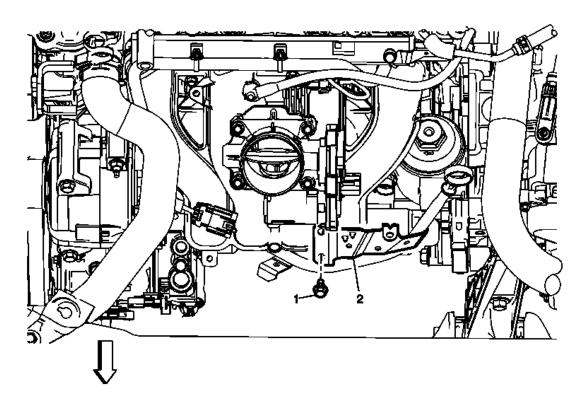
Oil Level Indicator Tube Courtesy of GENERAL MOTORS COMPANY
